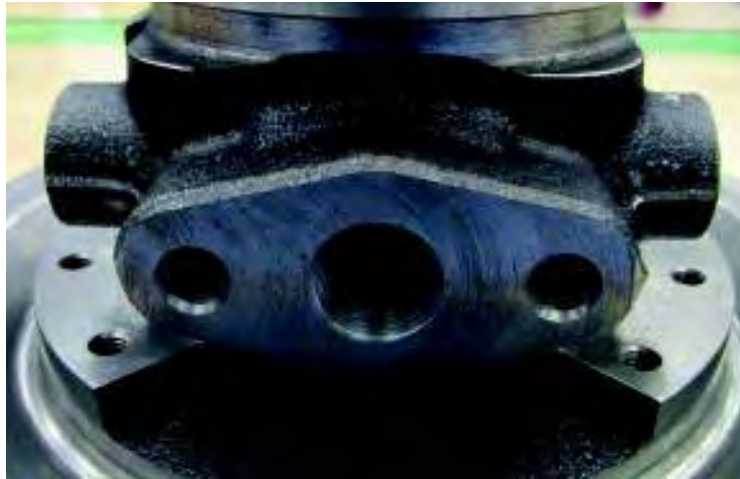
Oil Drain Pad Machined for Gasket and 3/8 NPT Fitting
